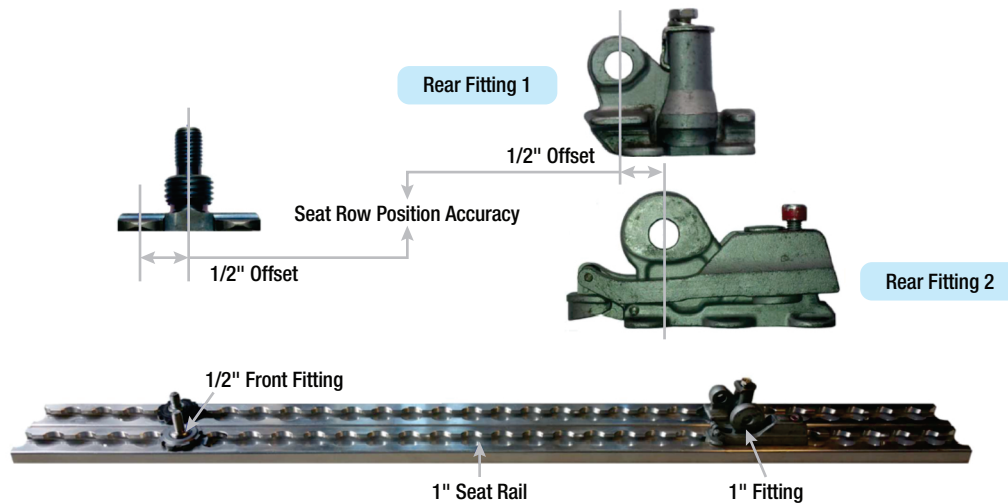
Typical aircraft adjustable seat attachment fittings.
